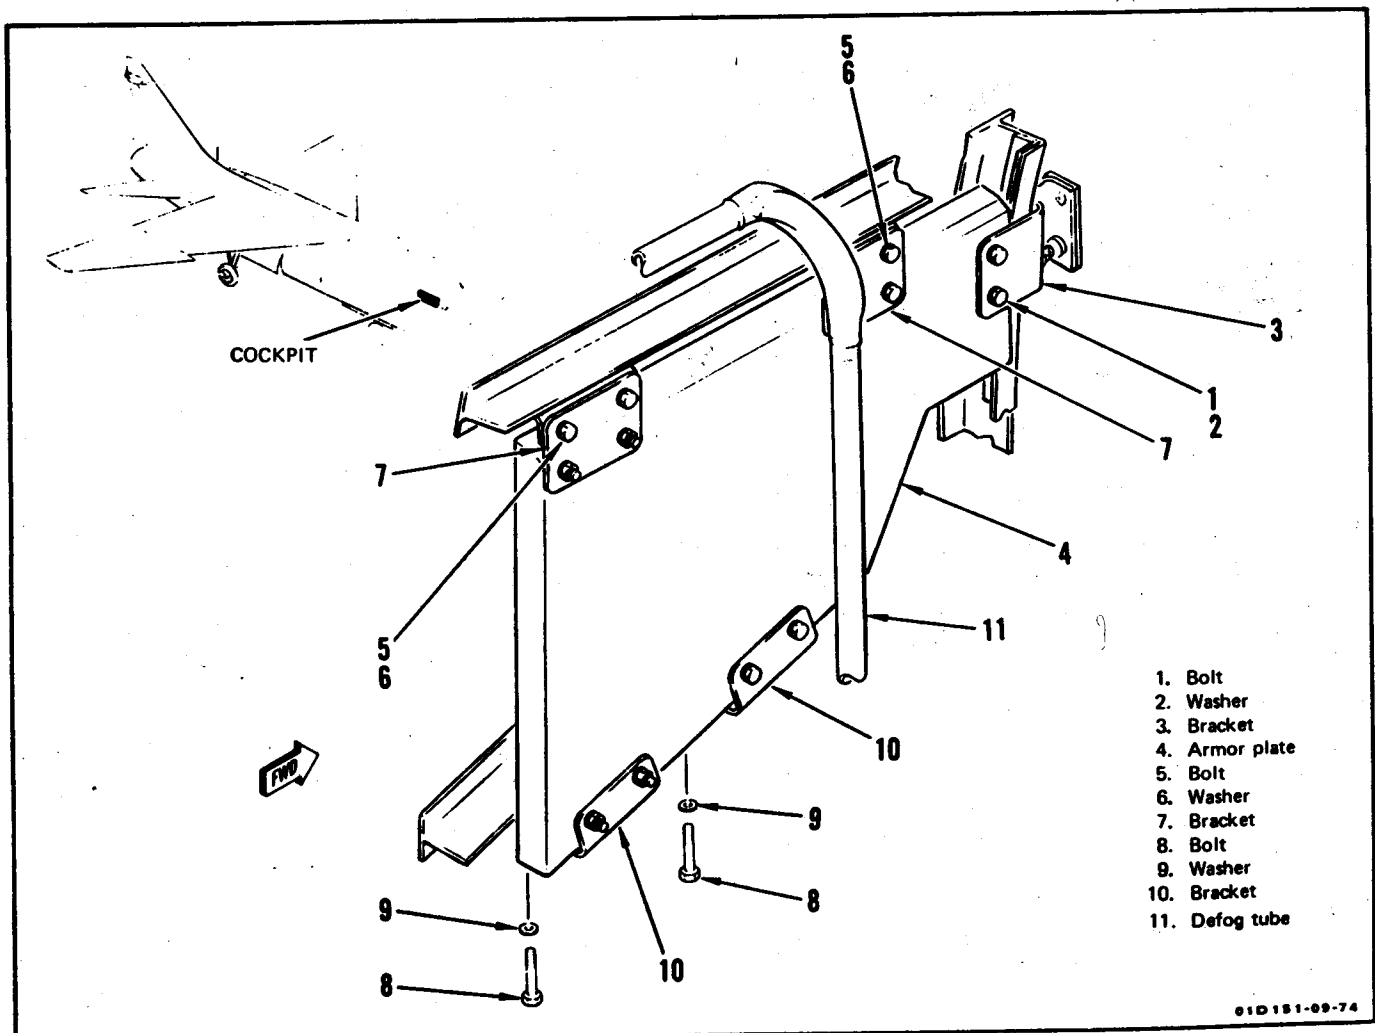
Cockpit Upper Right Side Armor Plate (FS 221 to 240) Removal and Installation
